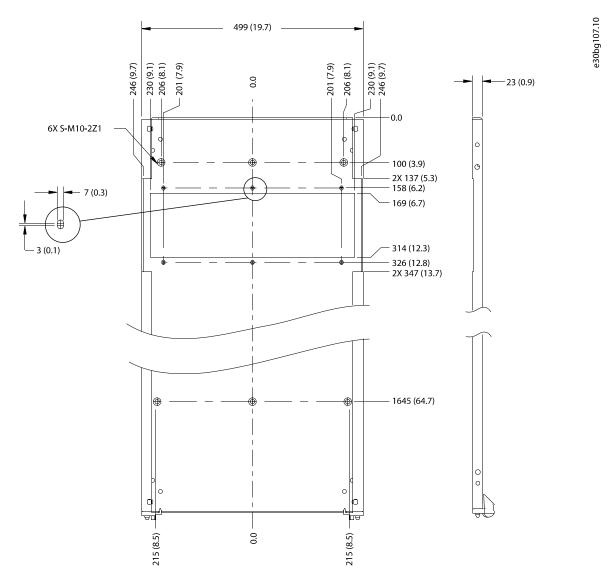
Vent Dimensions for Mounting Plate in 600 mm (24 in) Enclosure
